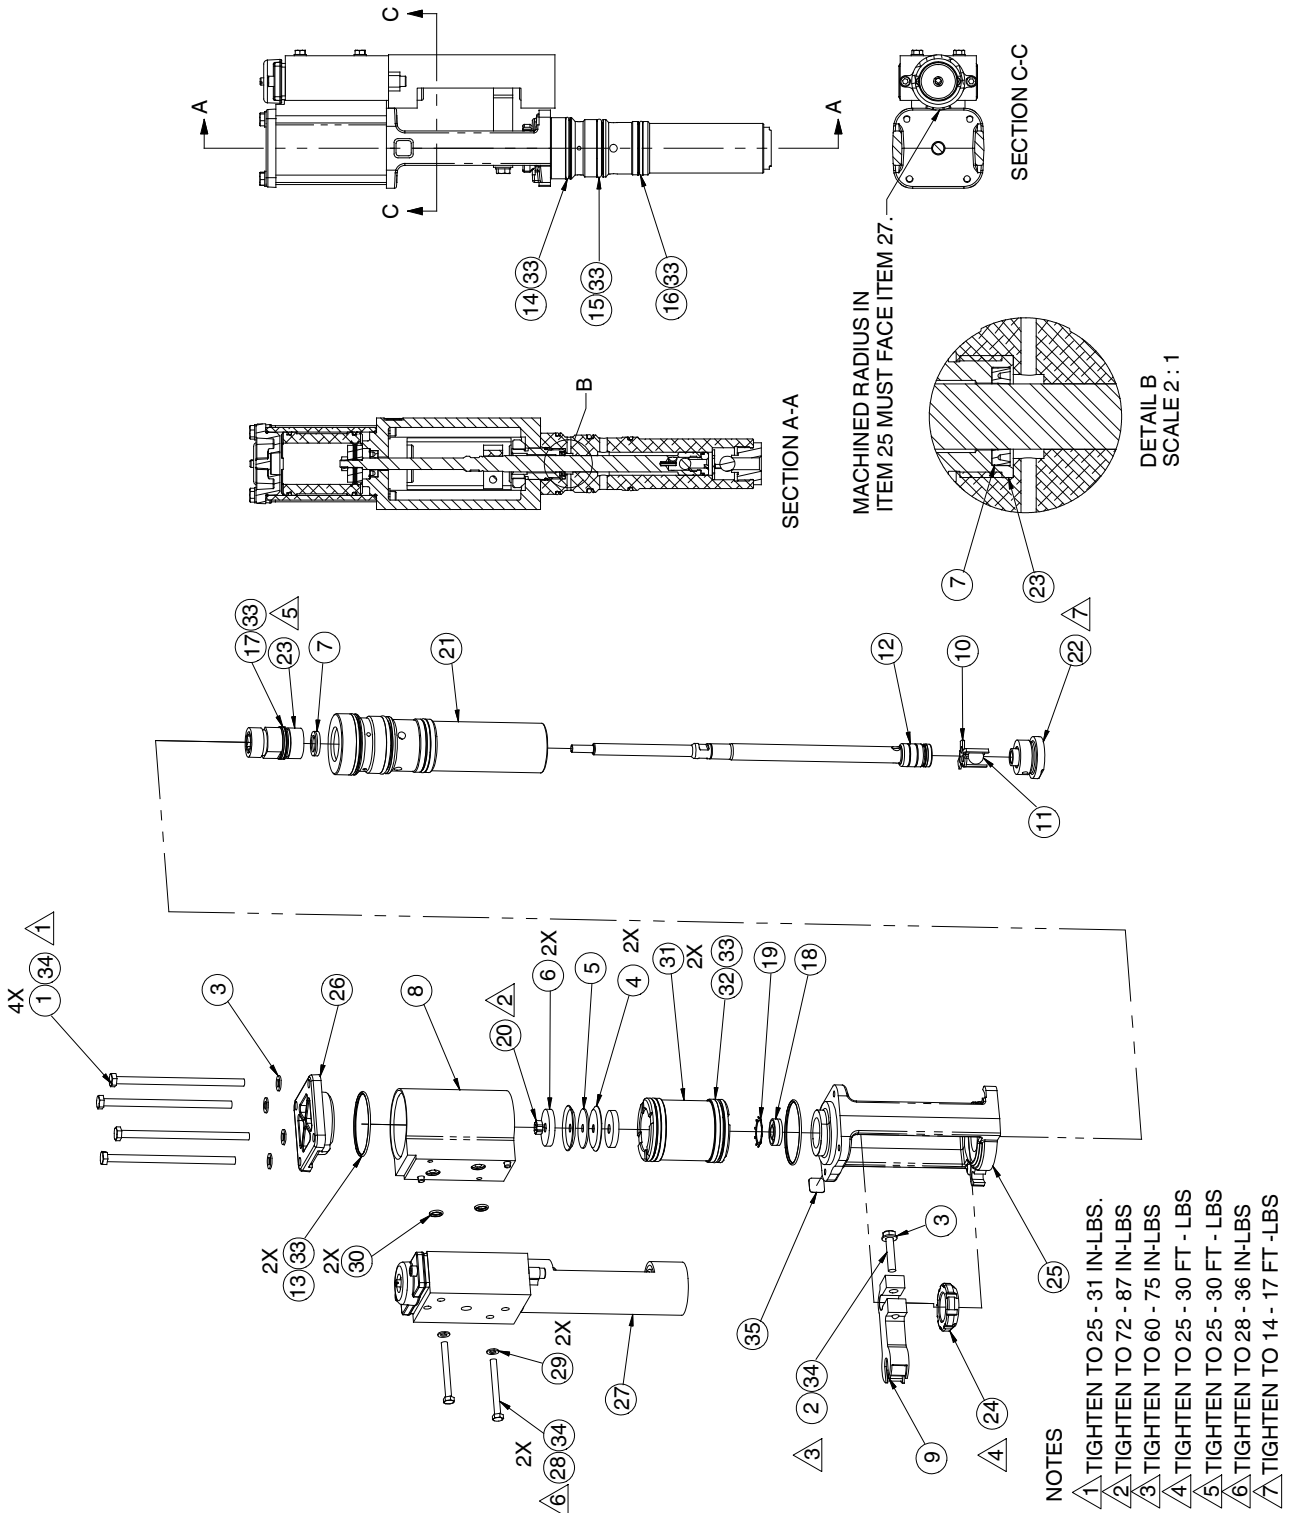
Low pressure/low viscosity double acting pump assembly parts drawing
